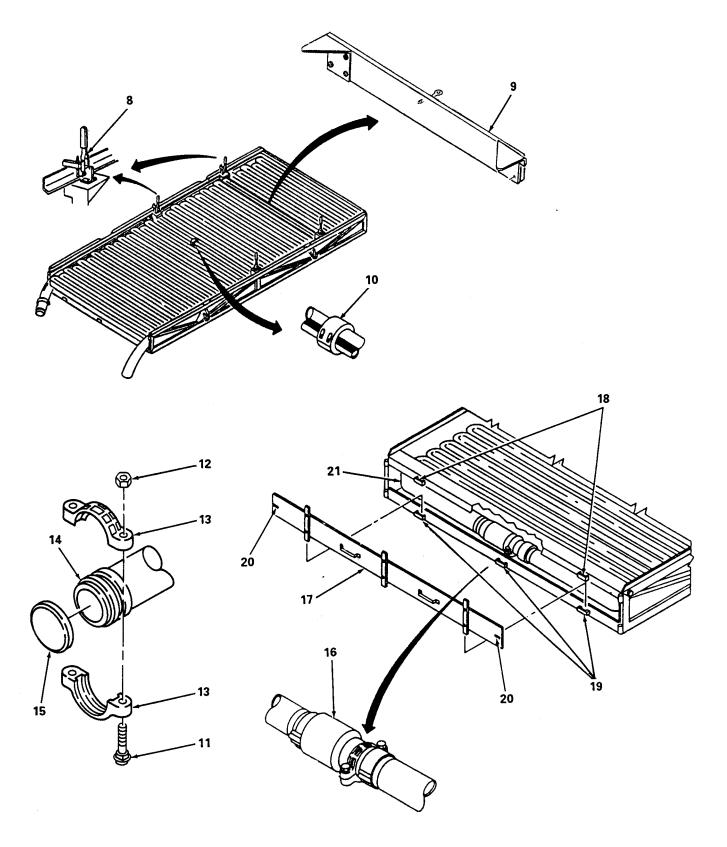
Packing Flaking Boxes (Sheet 2 of 2).
